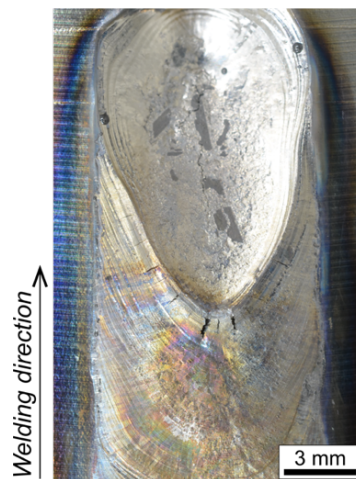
Appearance of weld bead after trans-varestraint test by hot-wire GTA welding.
